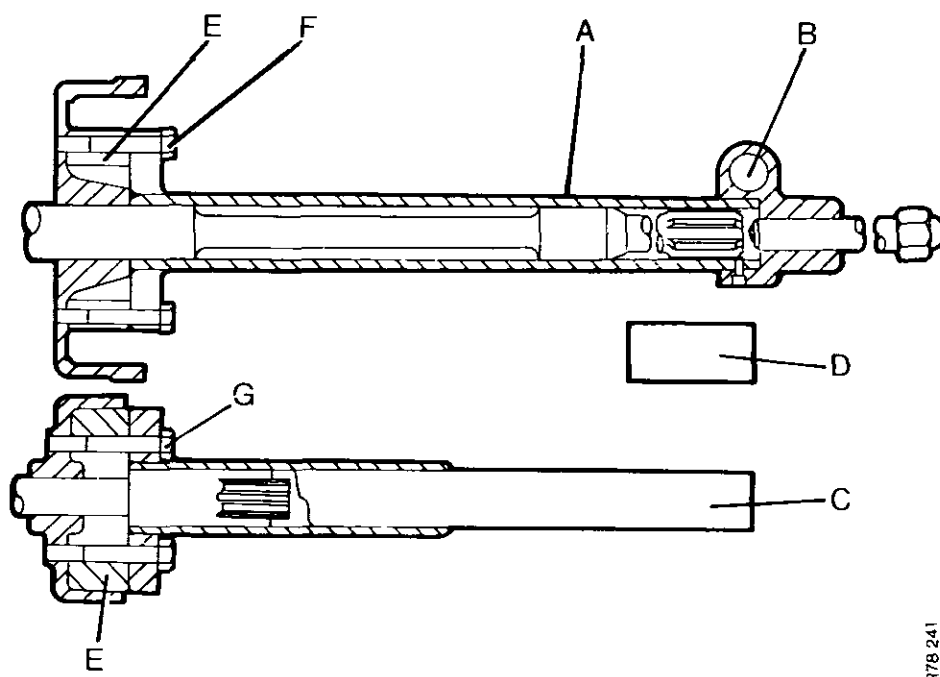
TOOL FOR REMOVING BRAKE DRUMS
